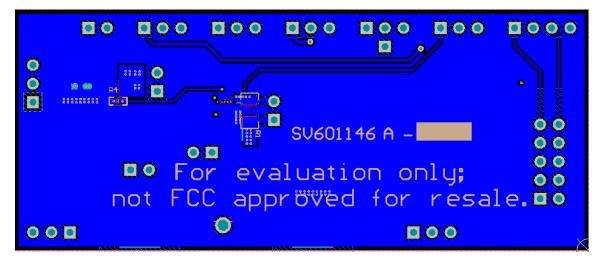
Bottom Assembly Layer (UNMIRRORED)
